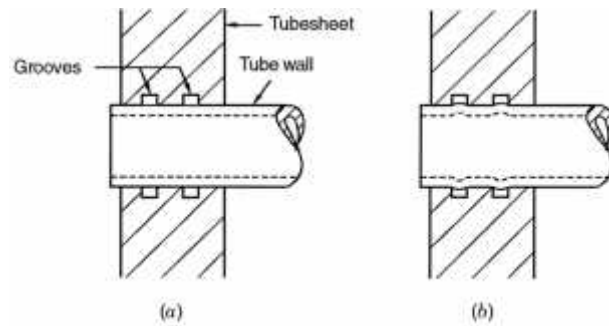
Details of a leak-free joint between the tube and tube hole of a tubesheet: (a) before tube expansion; (b) after tube expansion.
